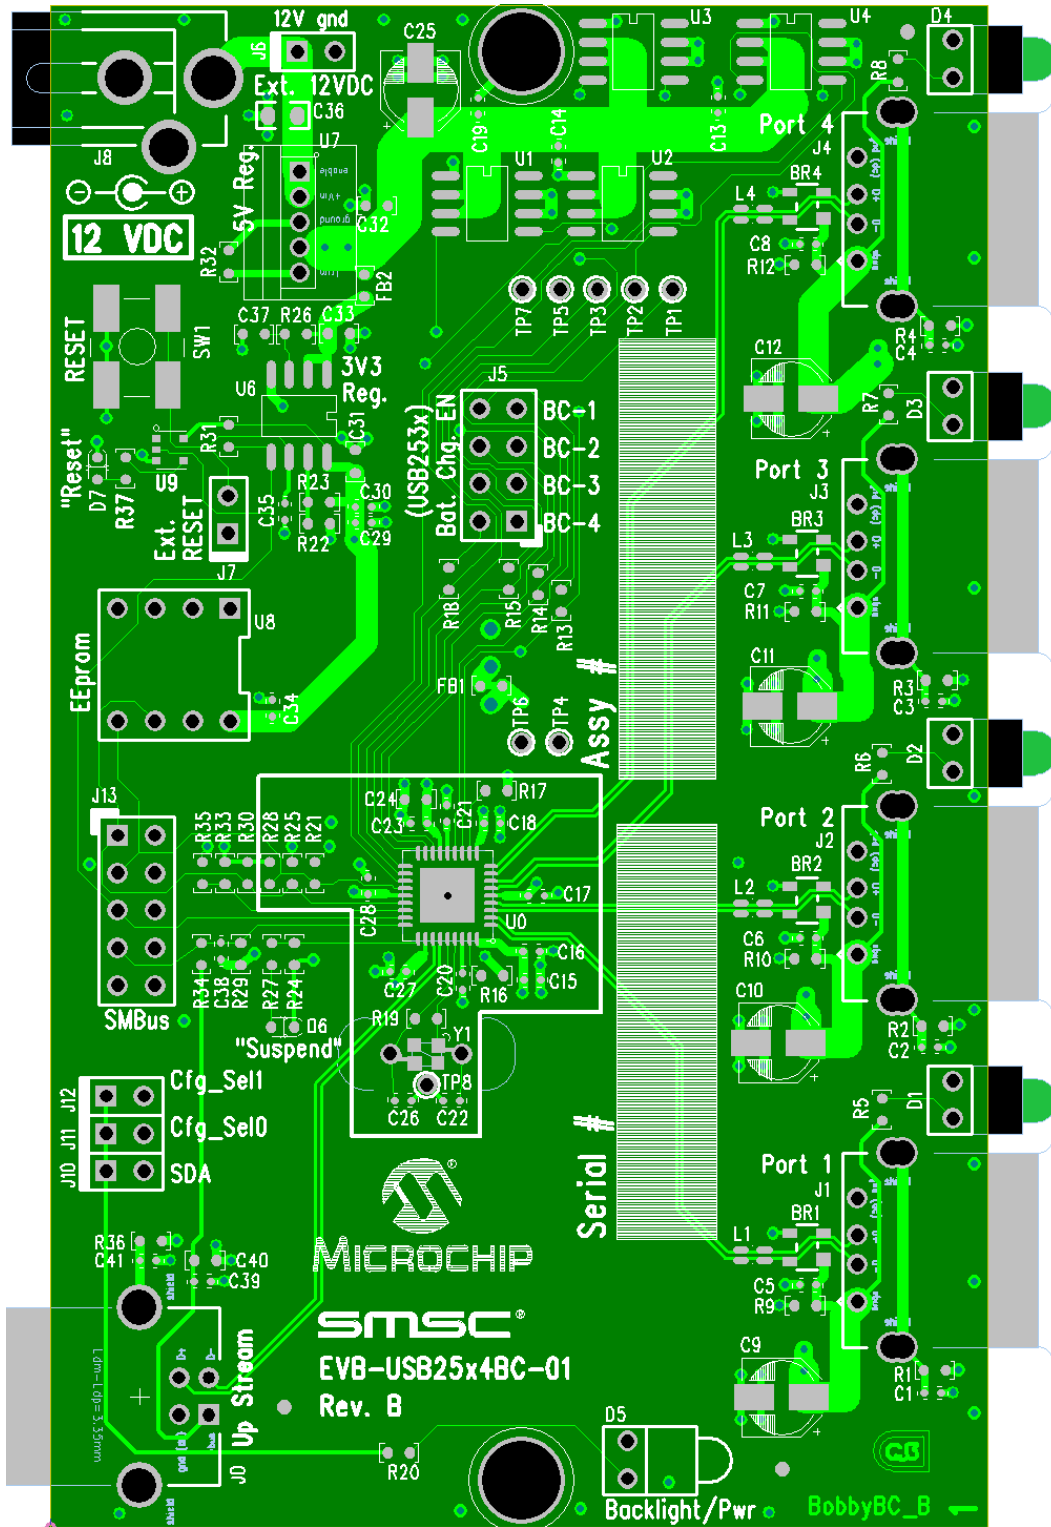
EVB-USB2534BC-01 Top Layer - Component Side
